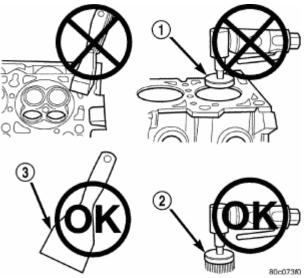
Proper Tool Usage For Surface Preparation Courtesy of CHRYSLER LLC
